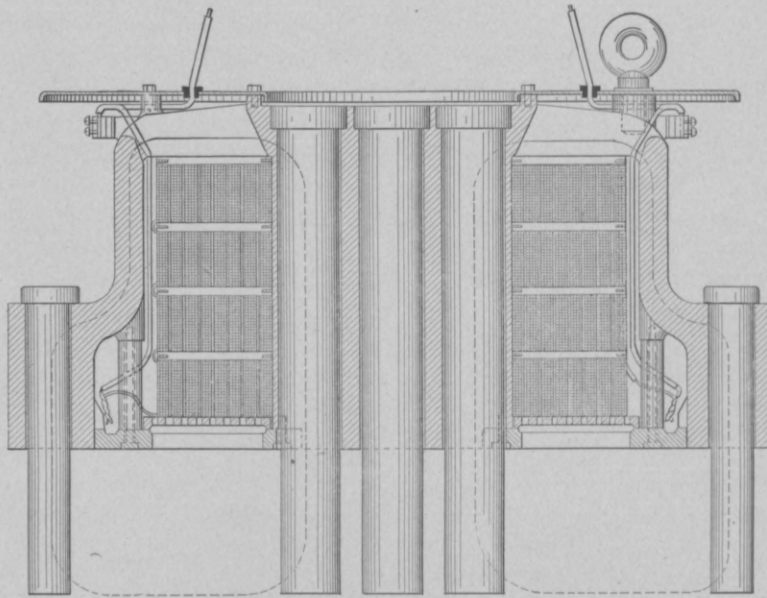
A Piek Magnet with Movable Pole Pieces.
